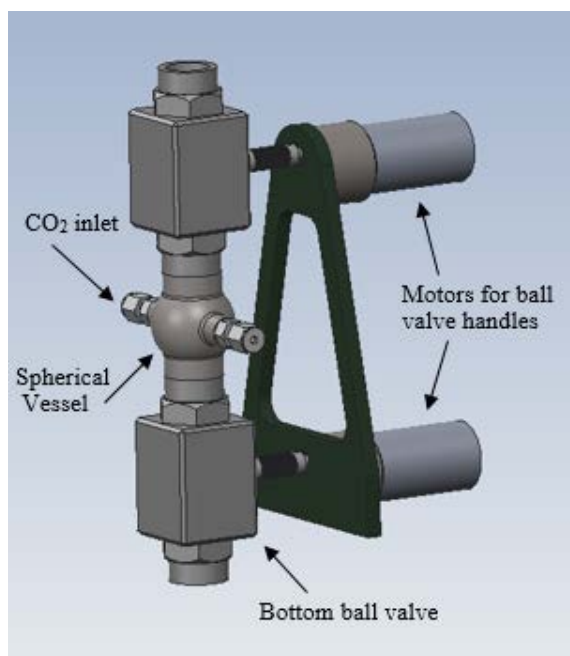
CAD Drawing of a 25 mL Spherical Pressure Vessel with Ball Valves
